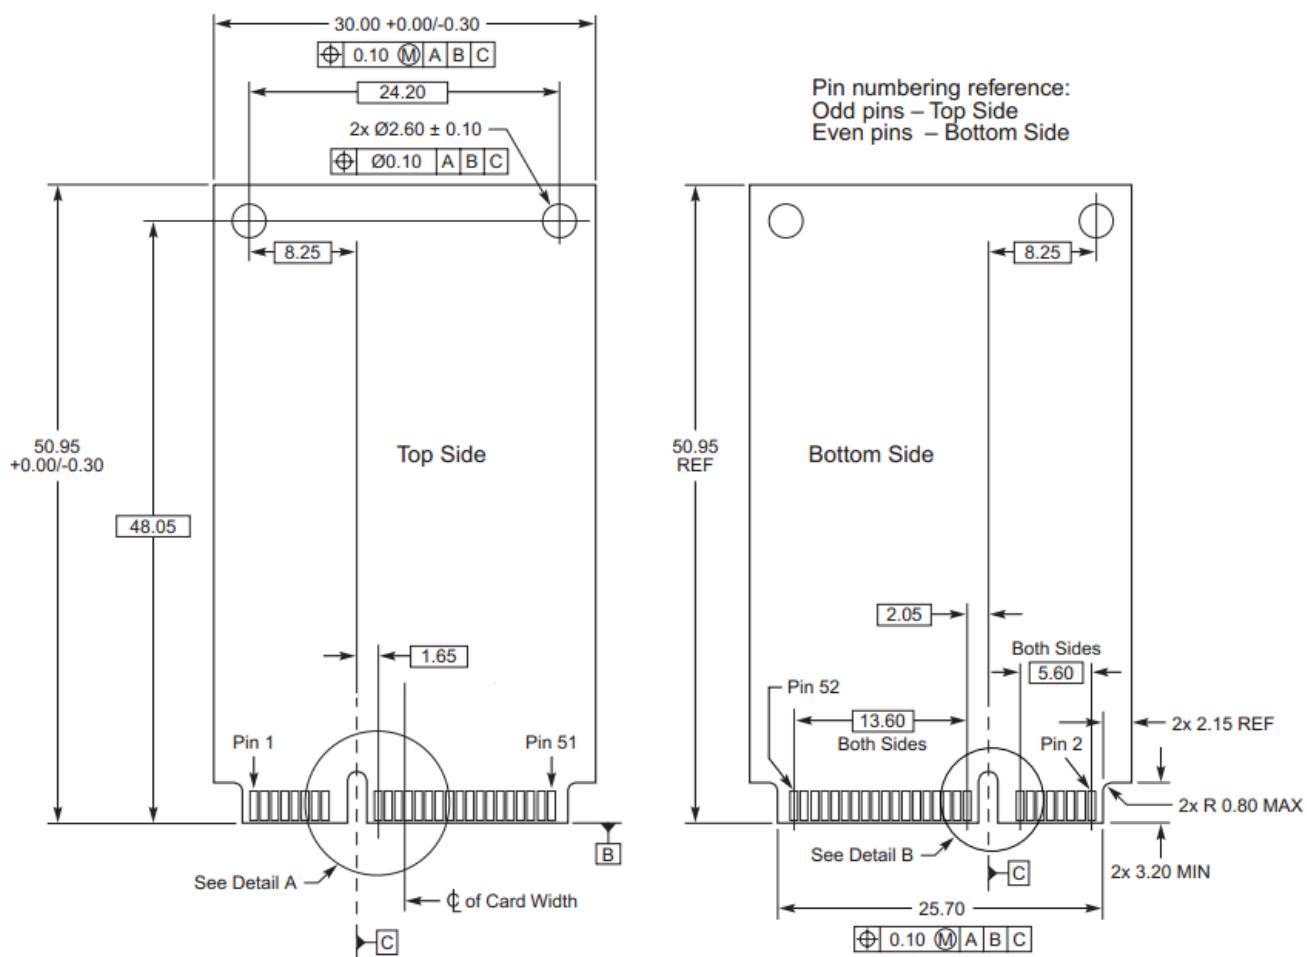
Mechanical Dimensions of BG95-M3 Mini PCIe
